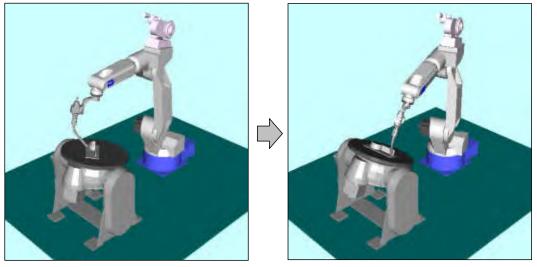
Arc welding using synchromotion control
